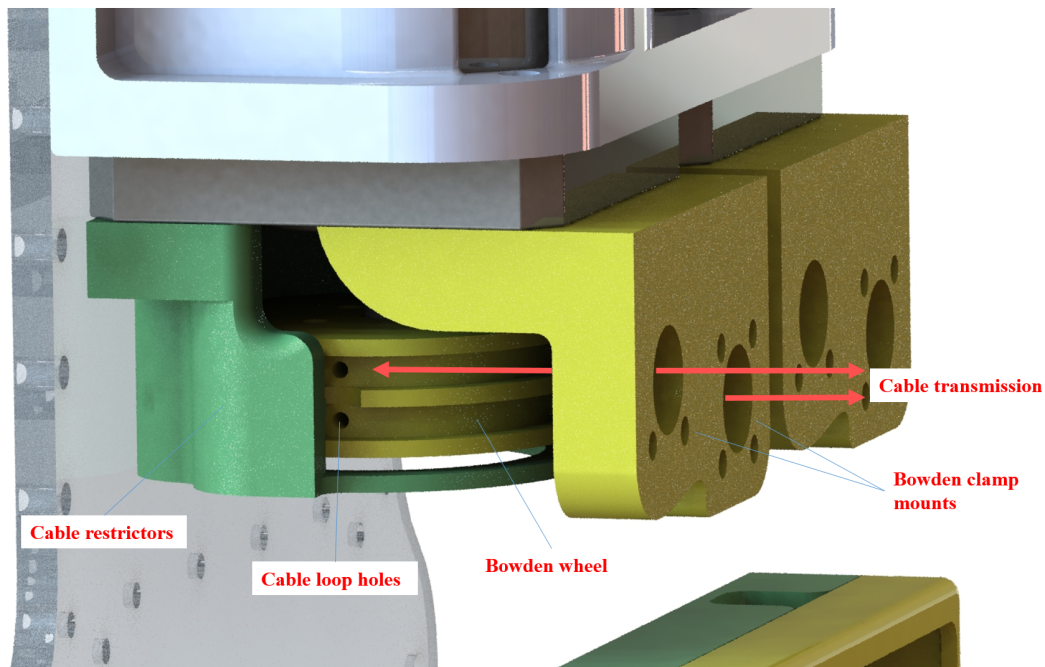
Bowden cable system 3D printed wheels/components
